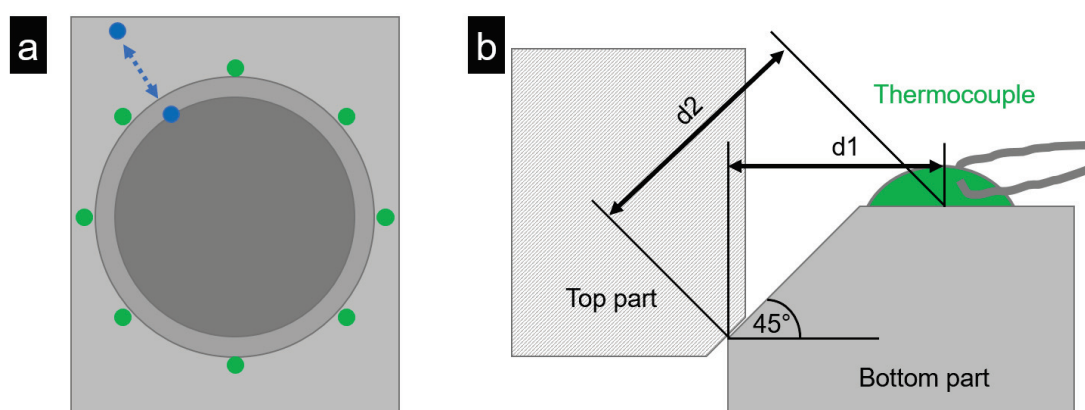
Top view of the thermocouple positions (green) on the bottom part of the welded geometry (a) and definition of the distances to the fusion zone in a cross section view (b). In a further measurement series the distance of the thermocouples to the fusion zone was varied systematically (blue dots). The welding geometry is the same as assumed for the mechanical simulation in chapter 3.1. The upper part is marked as the dashed area.
